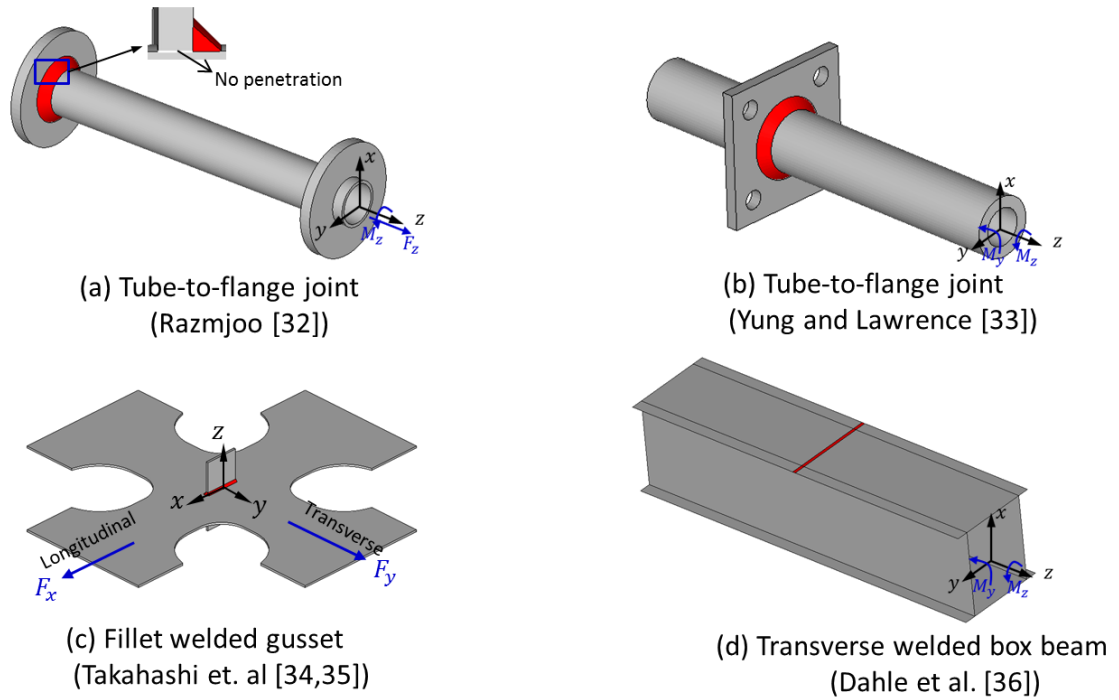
As-welded multi-axial fatigue test specimens and loading conditions
